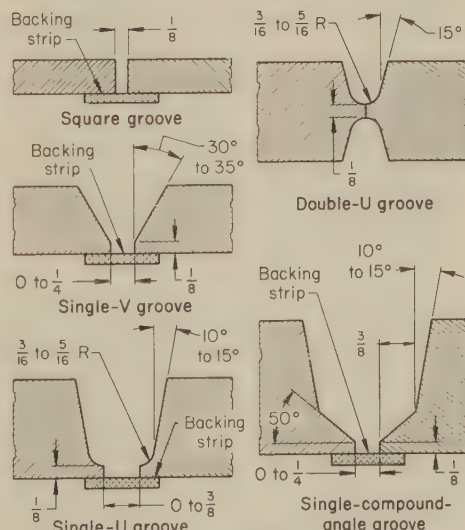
Joint designs for submerged-arc welding of nickel alloys
